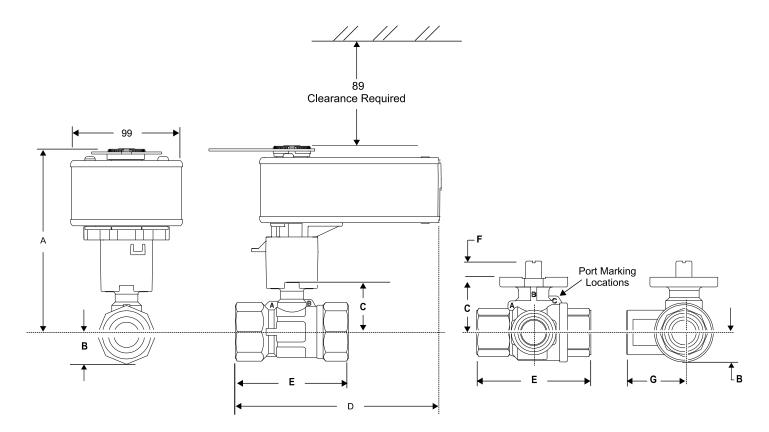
Spring Return VA9208 Actuated VG1205 and VG1805 Series Ball Valve with Optional M9000-561 Thermal Barrier Installed Dimensions, in mm
